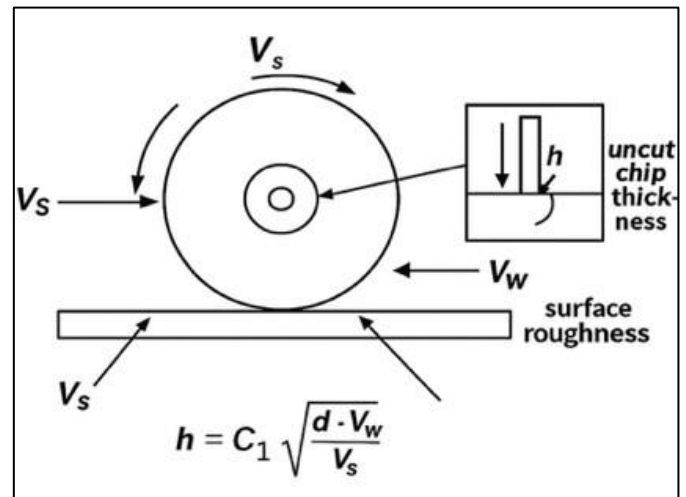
Schematic of Surface Grinding Showing the Wheel, Workpiece Feed Direction, Depth of Cut D, and Uncut Chip Thickness H.
